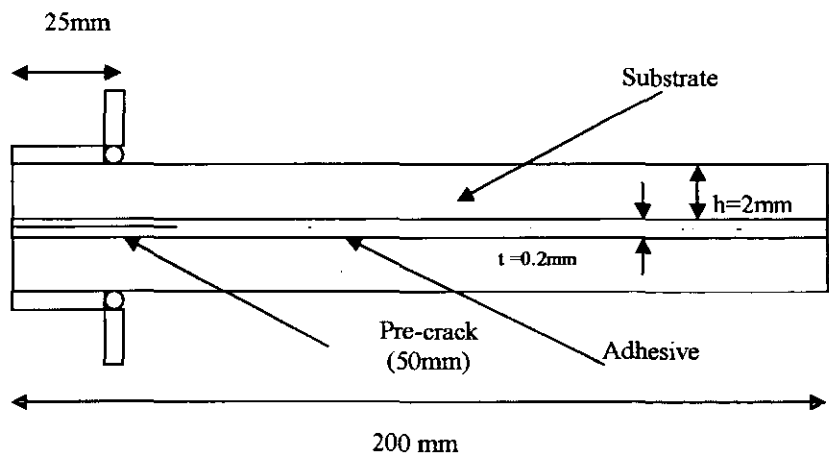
Double cantilever beam specimen with CFRP substrates.
